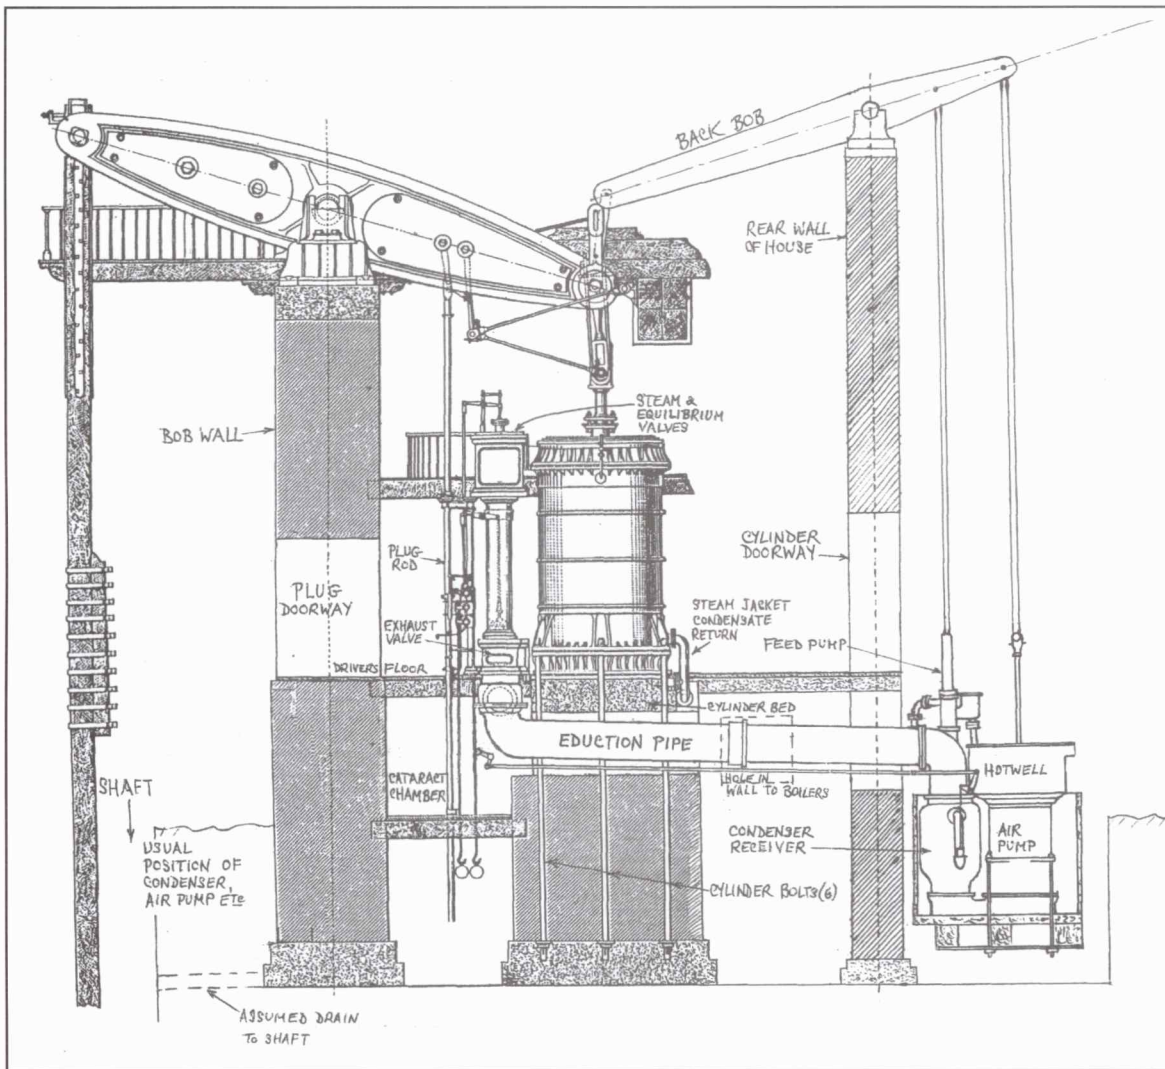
The deduced layout of Williams' engine showing the condenser assembly at the rear of the house instead of in front. It is approximately to scale but is based on an engine with a bigger cylinder.
